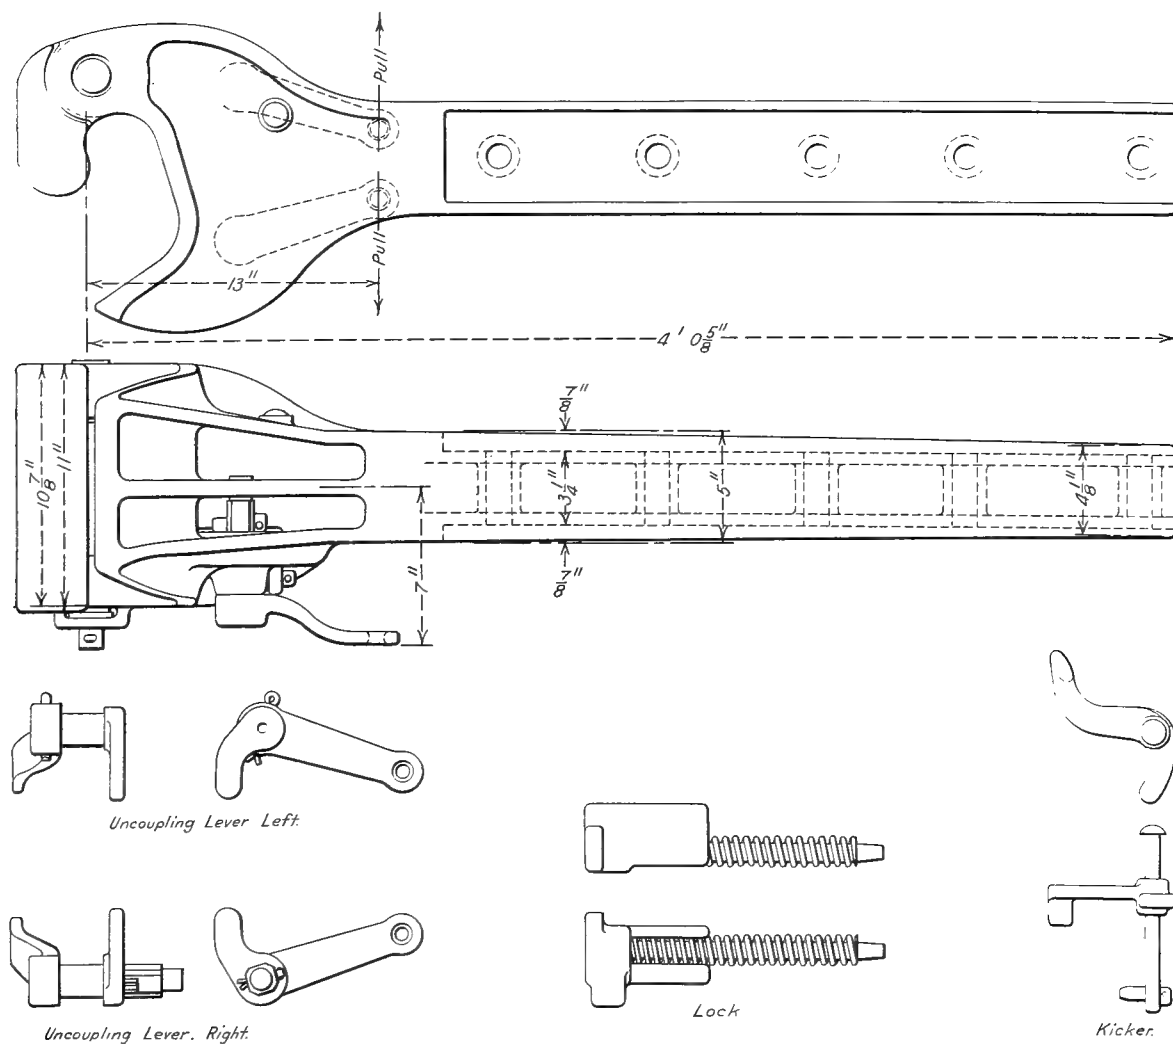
Double Bottom Operated Passenger Coupler. Gould Coupler Company.
